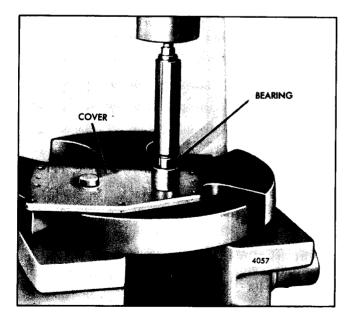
Installing Governor Cover Bearings using Tool J 21068
